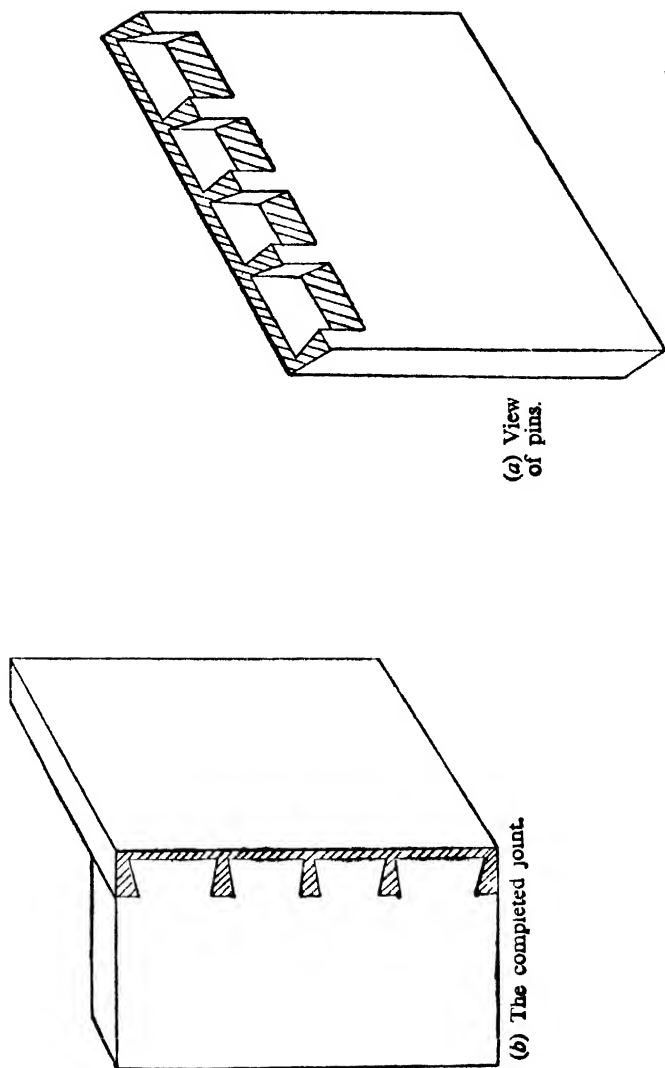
THE DRAWER DOVETAIL JOINT.
